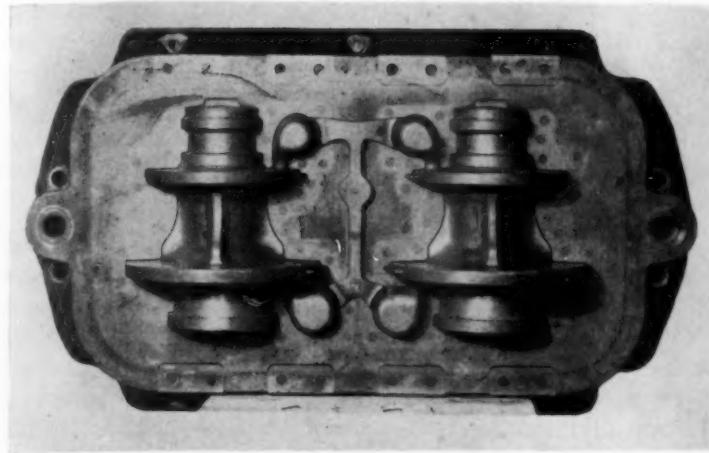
DOUBLE-FLANGE HUB EQUIPMENT MOLDED TWO ON A PLATE.
